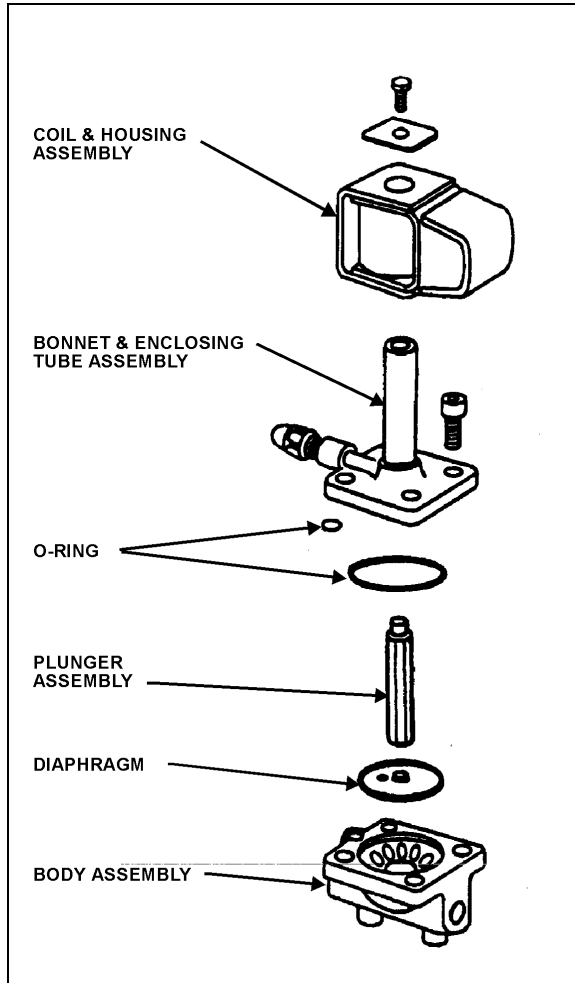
REFRIGERANT SOLENOID VALVE 22044
